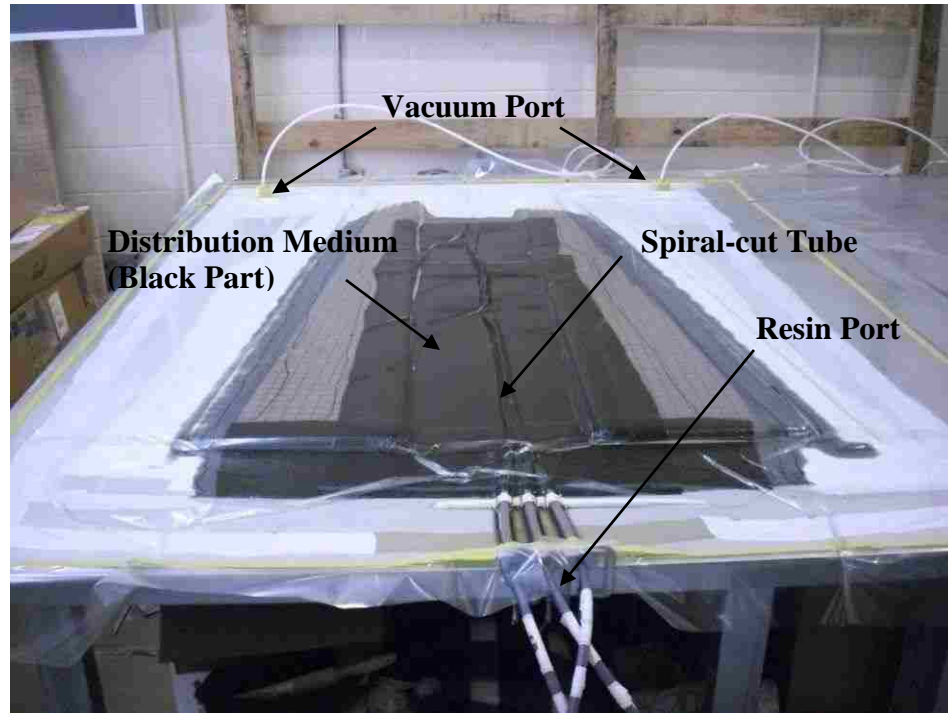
Composite panel set-up covered with a sealed vacuum bag
